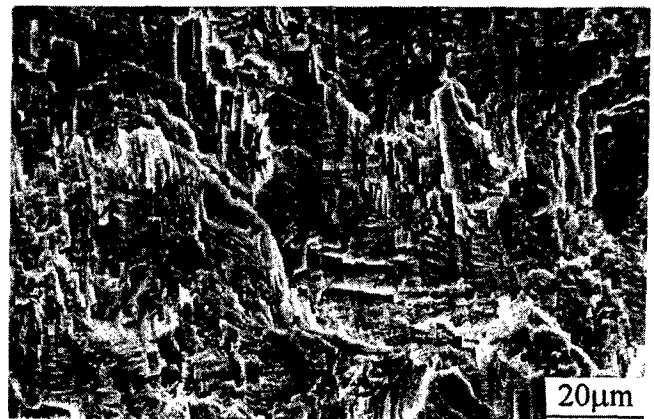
Fracture surface after fatigue crack growth at 700°C, 10 Hz in vacuum.
